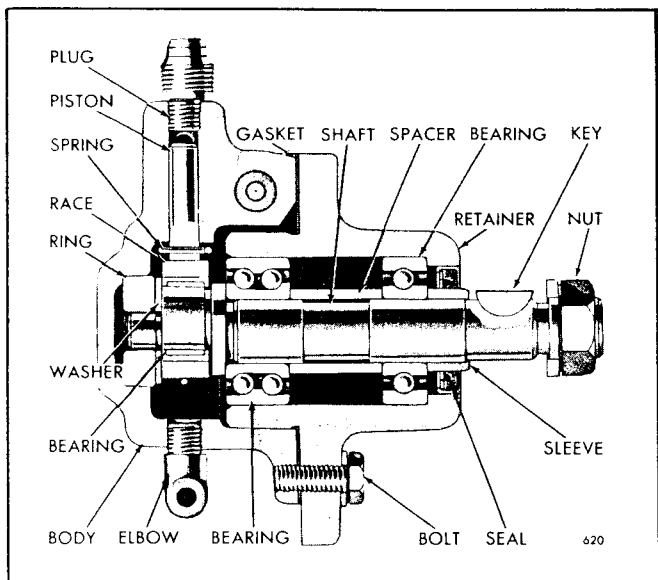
Belt-Driven Hydrostarter Charging Pump
